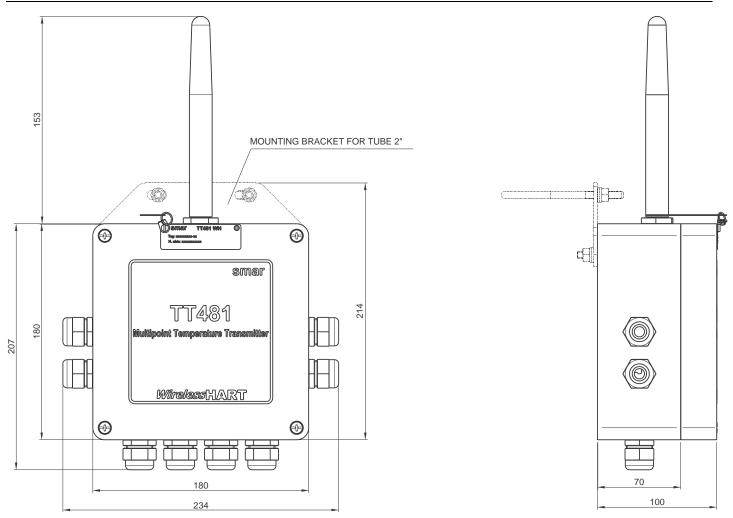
(a) – Dimensional Drawing - TT481 WirelessHART<sup>™</sup> with 4 Channels
